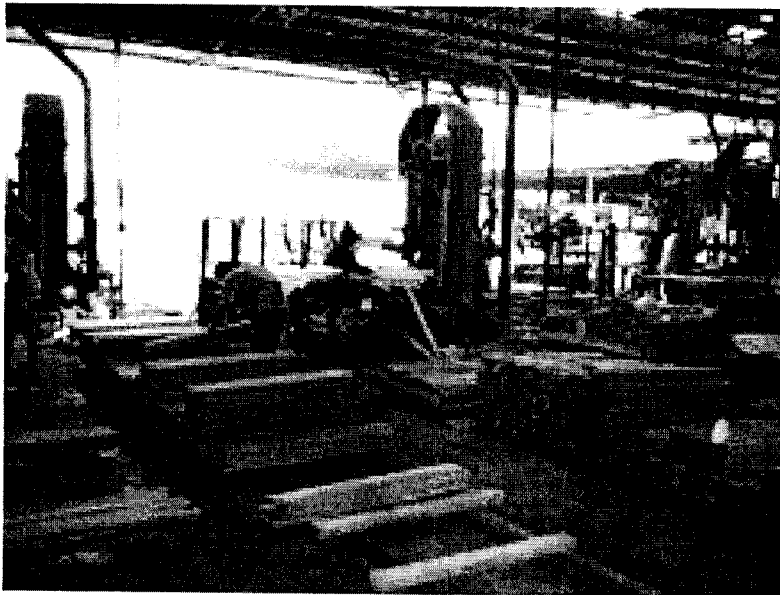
Band-saw Machine in sawing shop. (for Question # 4)
